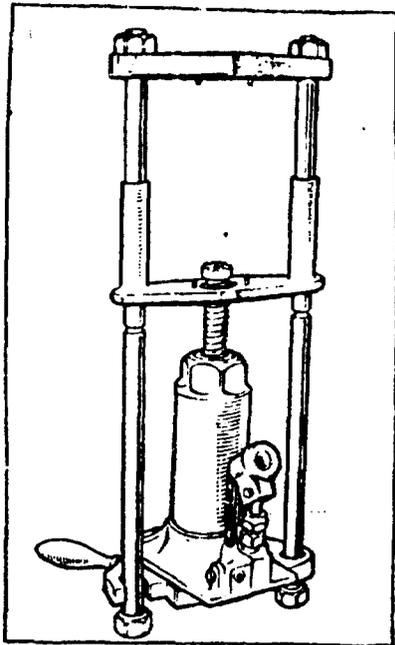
Model 2504 Press for Removing Turning Arm King Pins.
